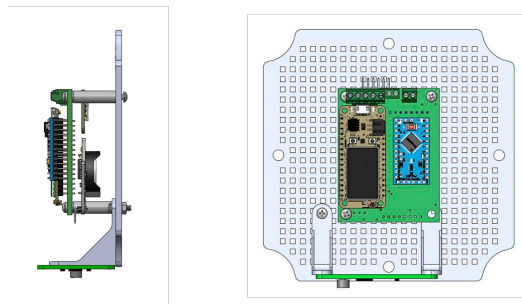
(Left) Side-view CAD of the electronics mounting assembly inside the enclosure. (Right) Custom PCB integrating Arduino Pro Mini, cellular module, ADC, RTC, and microSD storage.
